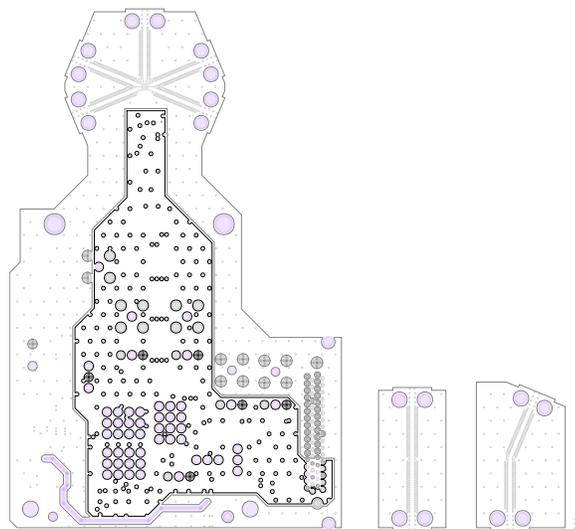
EVAL-ADGM3144SDZ Component Side Ground Plane PCB Drawing (Layer 3)
